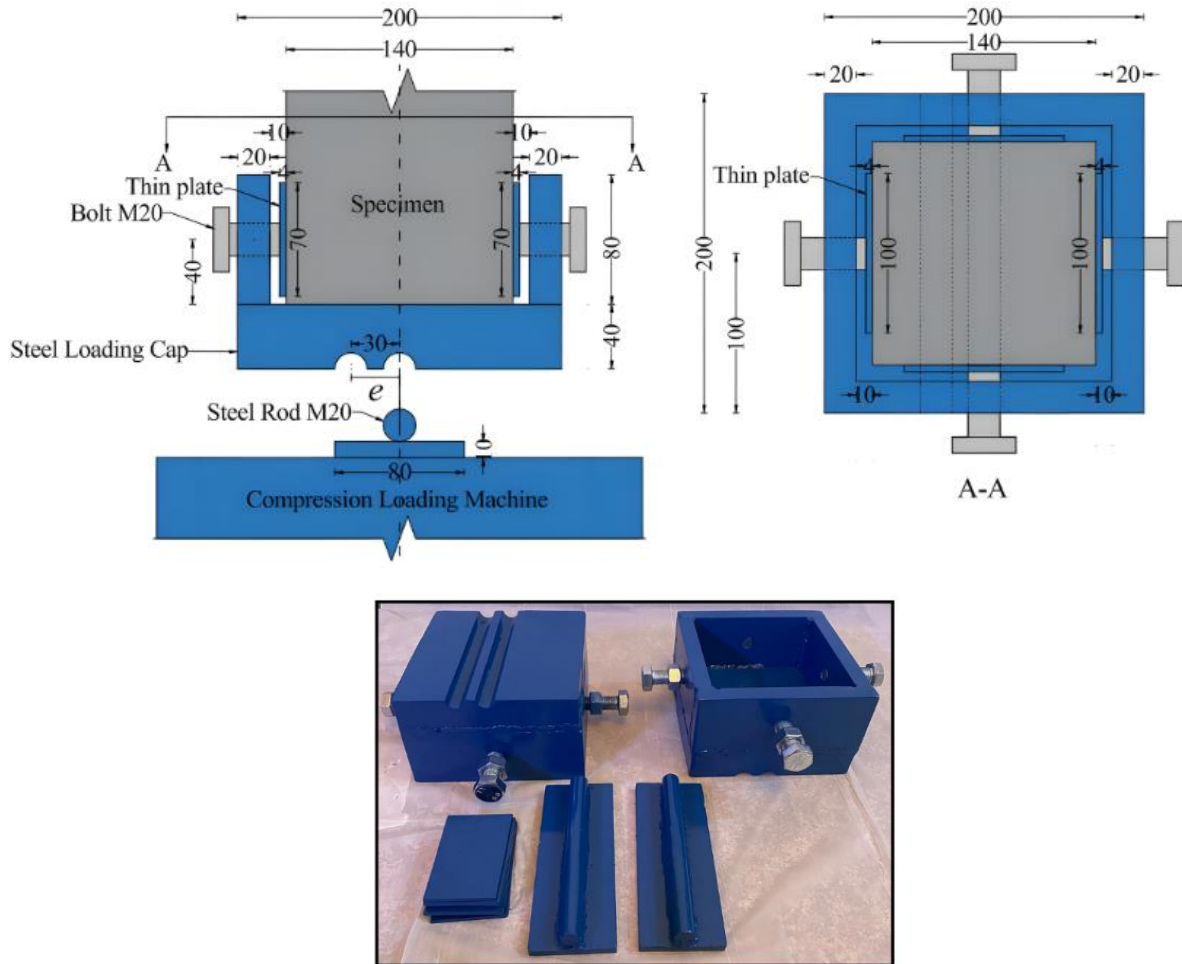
Details of the custom-fabricated steel loading caps used in the experimental setup (all dimensions are in mm)
